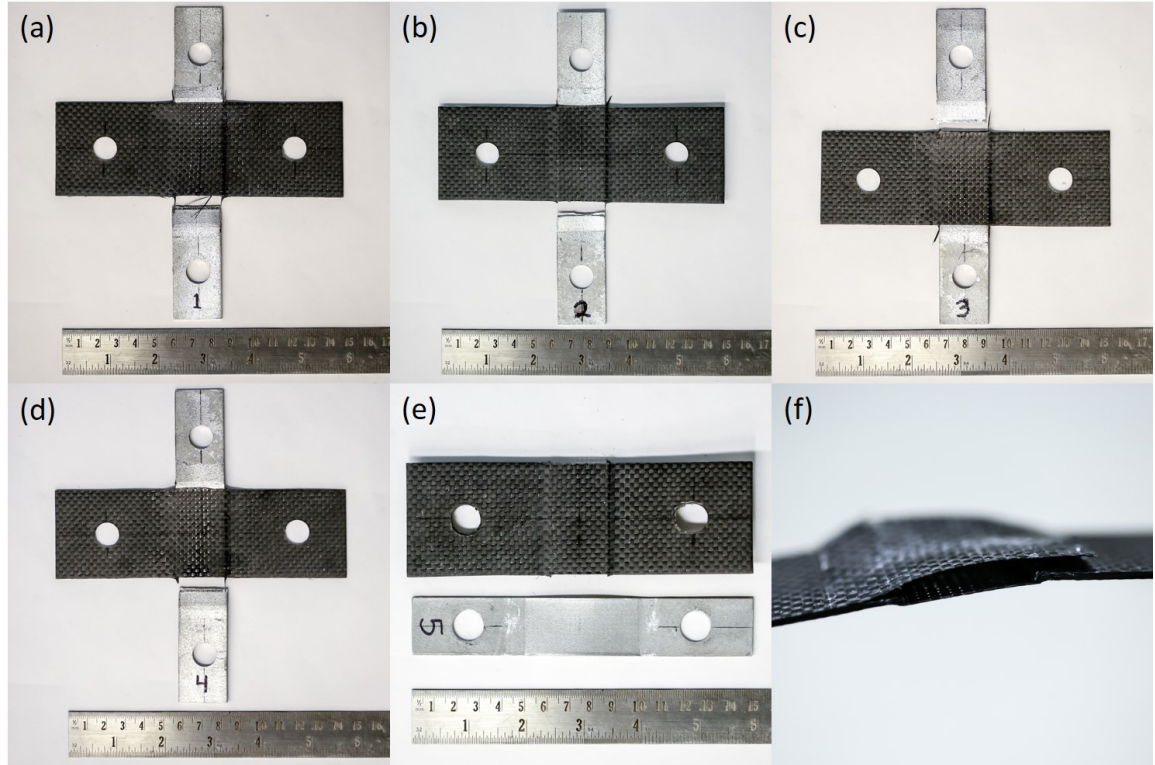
Failed CF-Al cross tensile joints. (a-e) Joints with embedded CF and sandwich features. (e) Joint with no embedded CF, adhesive only. (f) Detail of CF sandwich delamination and shearing from specimen 5.
